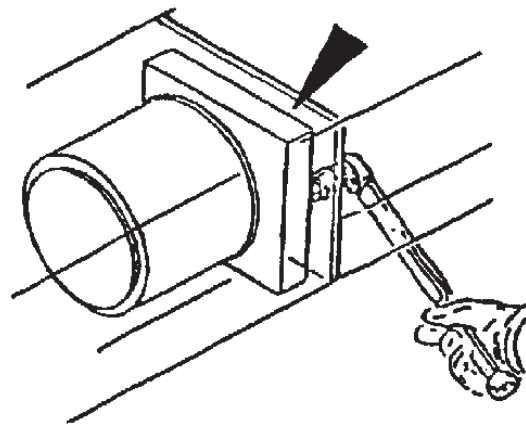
Install Hydraulic Tensioner onto Cross Bulkhead.
